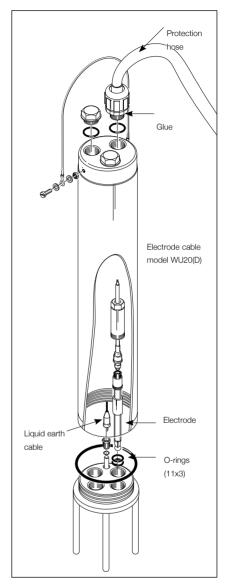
Mounting cables and sensors in 3-hole and 4-hole fittings
